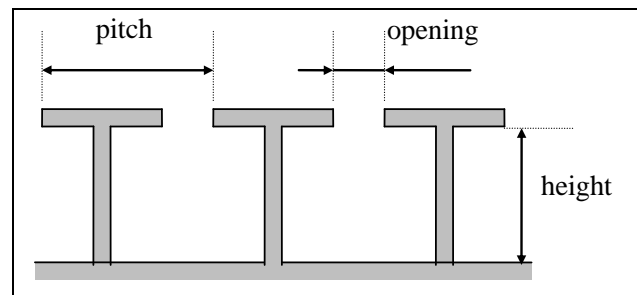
, schematic cross section of a T-bar floor section. Standard dimensions in 40ft HC reefers: height = 60 mm, pitch = 63.5 mm, opening = 35 mm.
